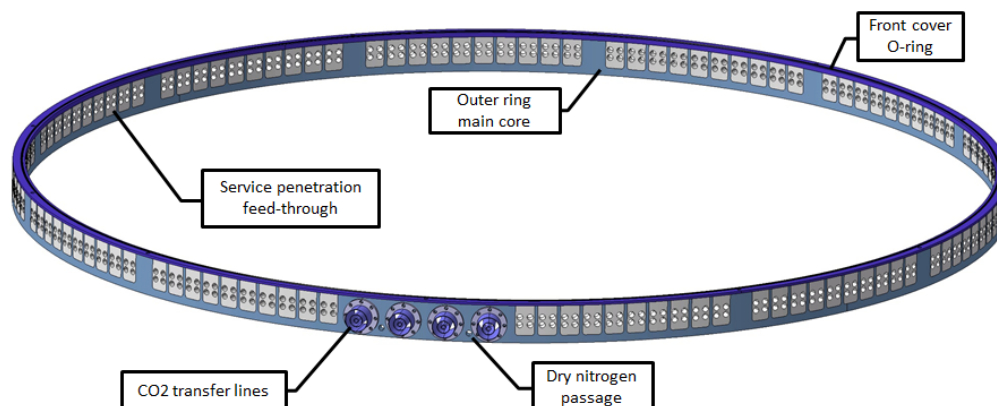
The outer ring assembly. The largest part of the hermetic vessel, with 2 m in diameter, it contains the service feedthroughs for cables, CO₂ transfer lines, and dry N₂ pipes. REPLACE WITH NEW DRAWING FROM CHINA
